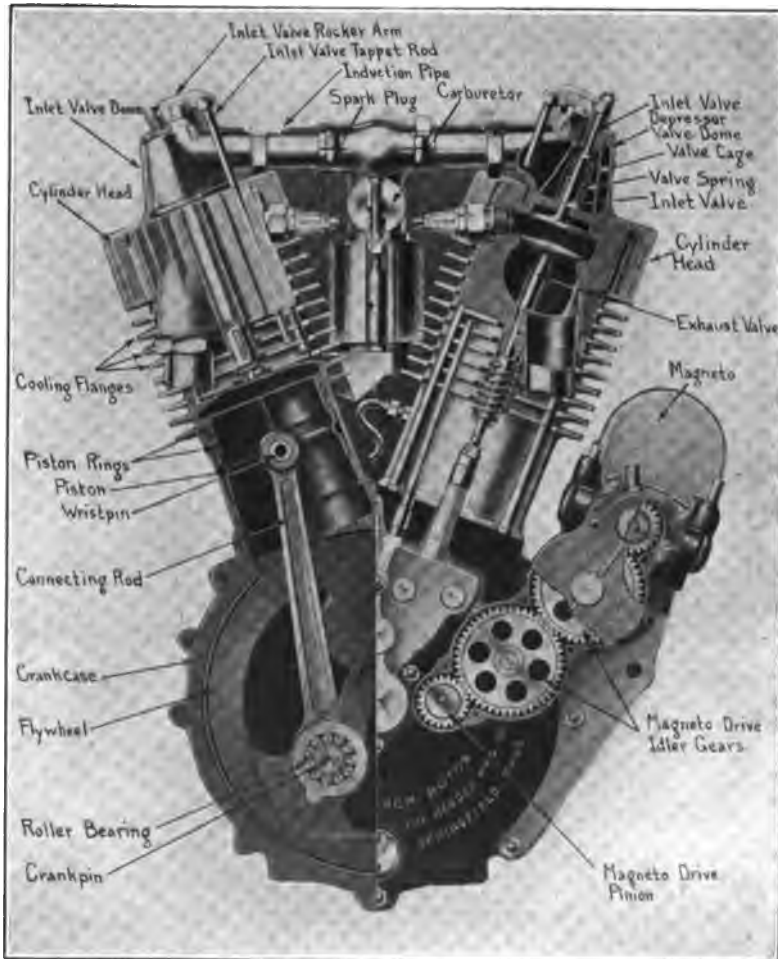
Part sectional view defining construction of twin-cylinder V motor used on Indian motorcycle.
